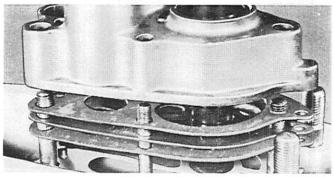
Water Pump Gaskets and Face Plate July 1960 Section III - Lower Unit
